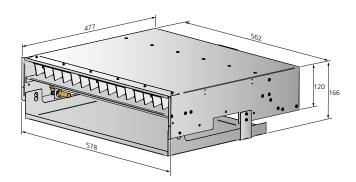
Dimensional drawing excl. grille, incl. leakage indicator, sleeve connection side 2.
